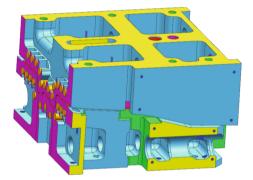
The design of the mold structure and the hollow design of the heating zone.
